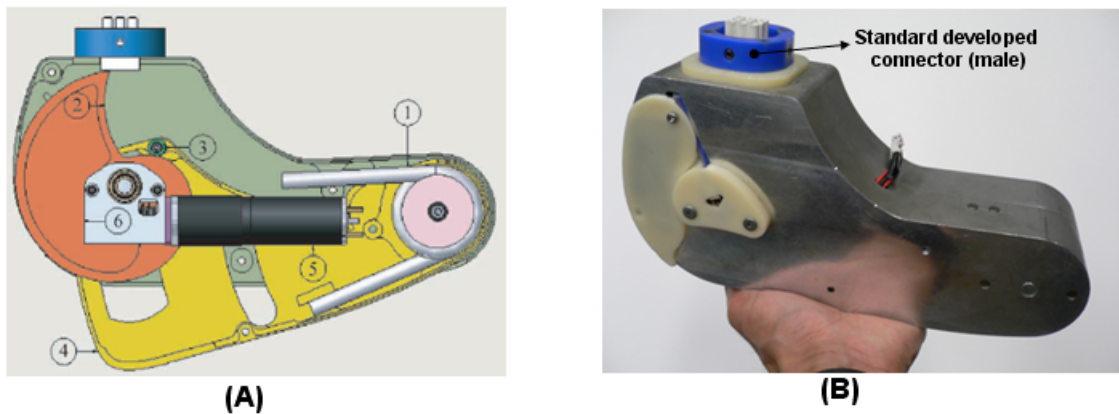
(A): To realize the jumping capability, Cam Charger mechanism was designed to fit to the foot shape: (1)torsion spring(s), (2)special designed cam, (3)needle bearing, (4)releasing part, (5) motor and (6) worm gear box. (B): This figure illustrates the developed jumping foot with capability of jumping.
